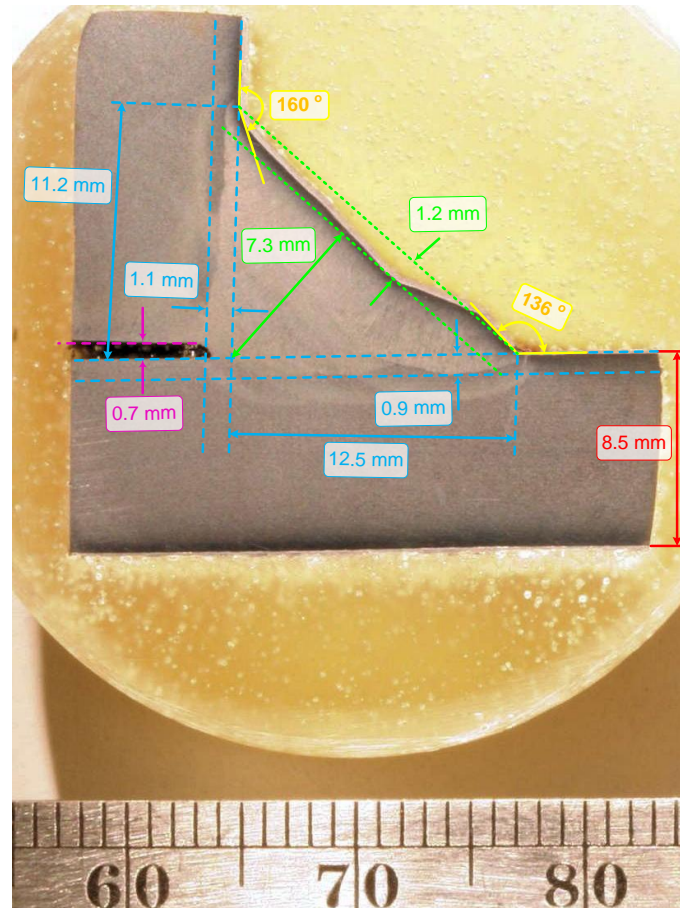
Macroscopic photograph of cross-section from S-61-0002 displaying the key weld bead geometric dimensions.
